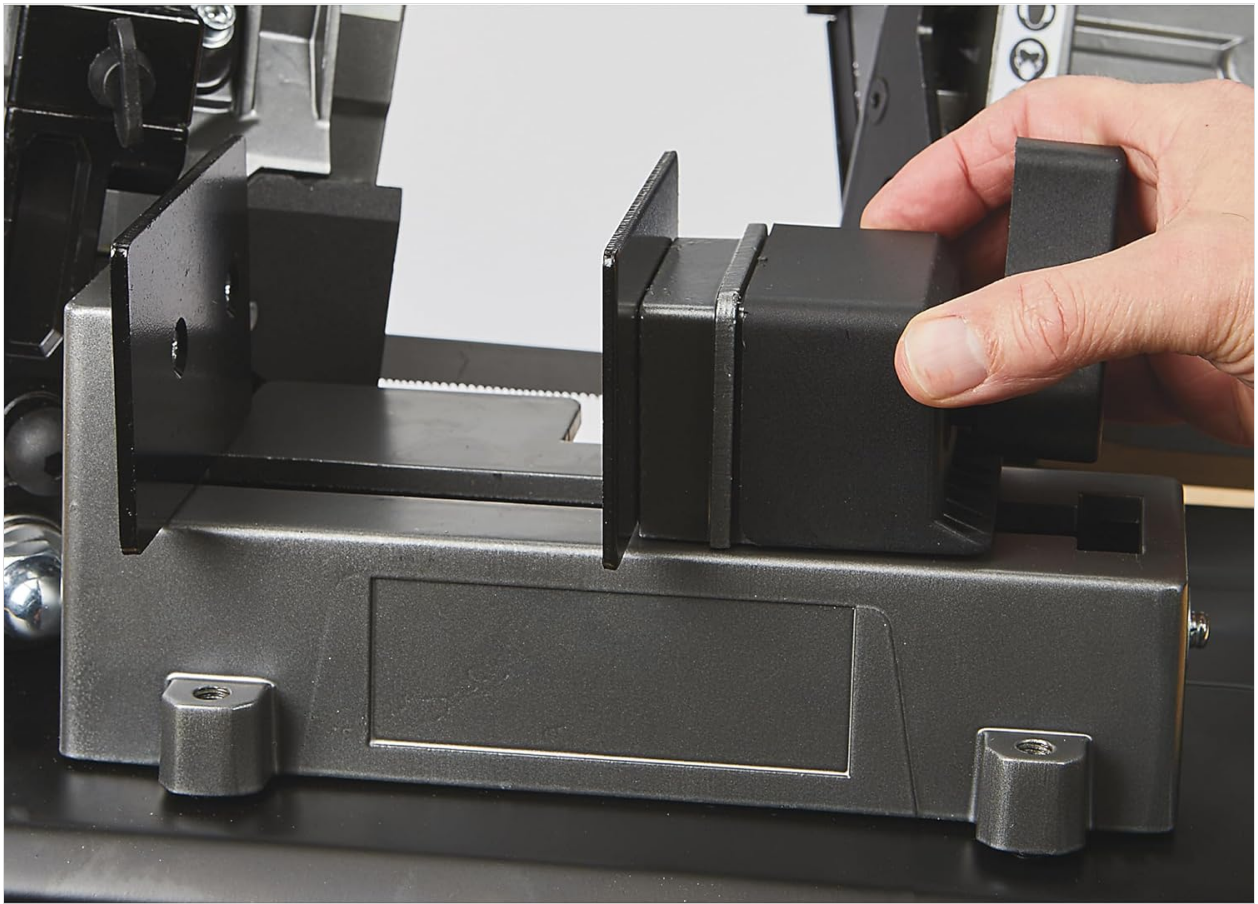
Close-up of the workpiece vise clamp, designed for quick and secure material fastening.
